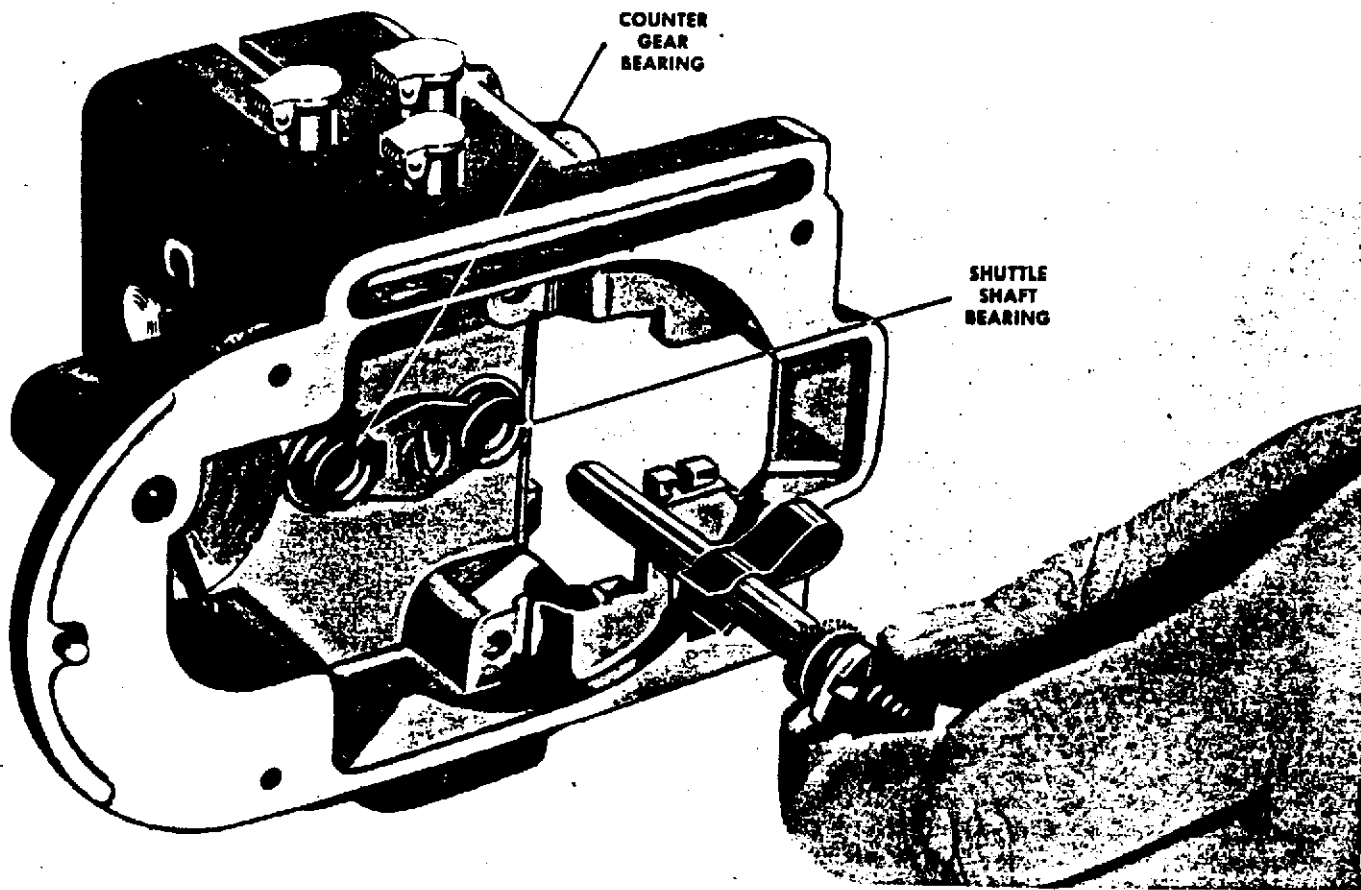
, Reassembly of Counter Gear and Shuttle Shafts
